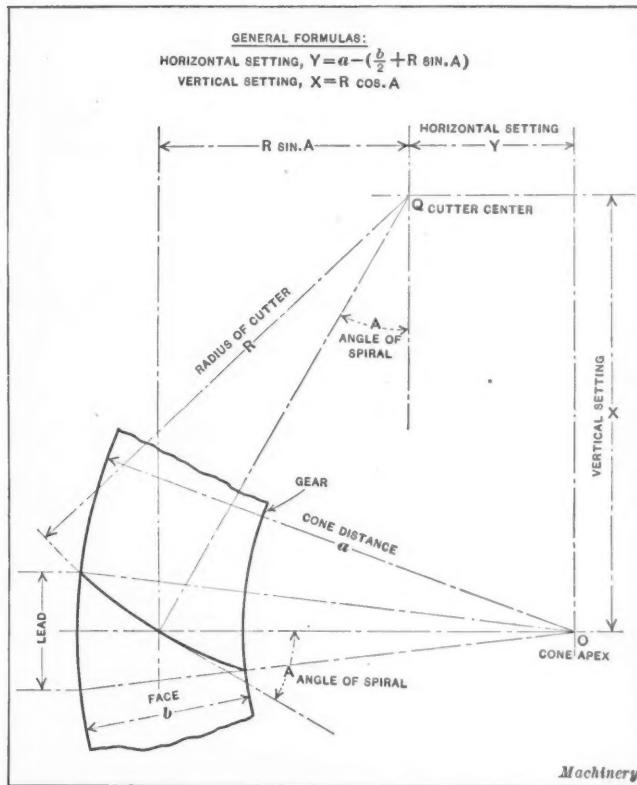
Horizontal and Vertical Settings for Roughing Cutter Center for Right-hand Spiral Gear
